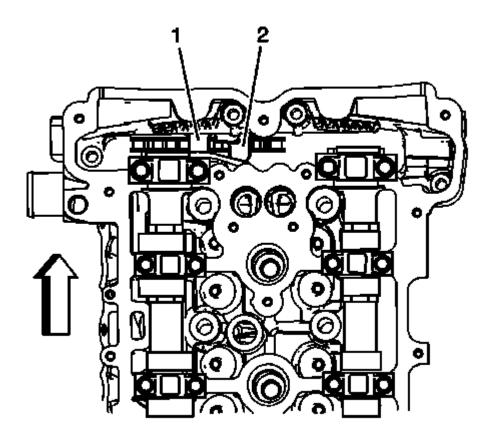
Timing Chain Retention Tool On Intake Side Courtesy of GENERAL MOTORS COMPANY
